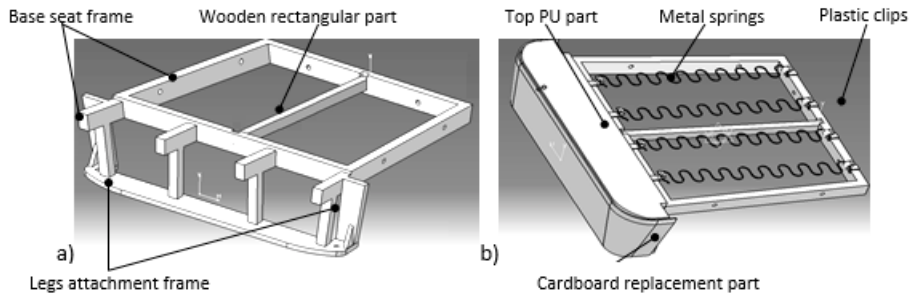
PU designed 3D model seat frame components: a) PU frame; b) complete frame
